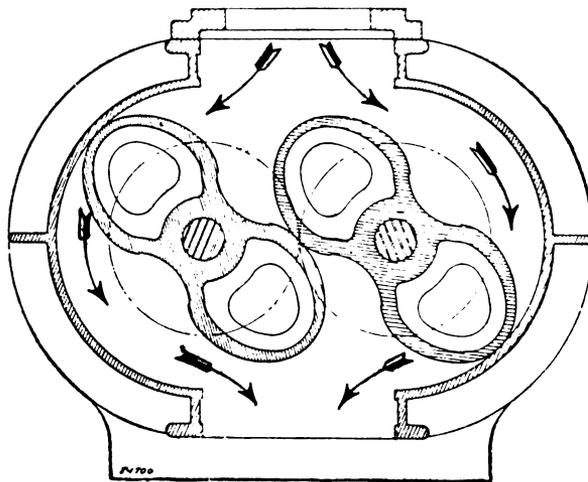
Cross section of a typical positive-pressure two-lobe rotary air pump used for conveying cottonseed. Rotation may be reversed if desired.
